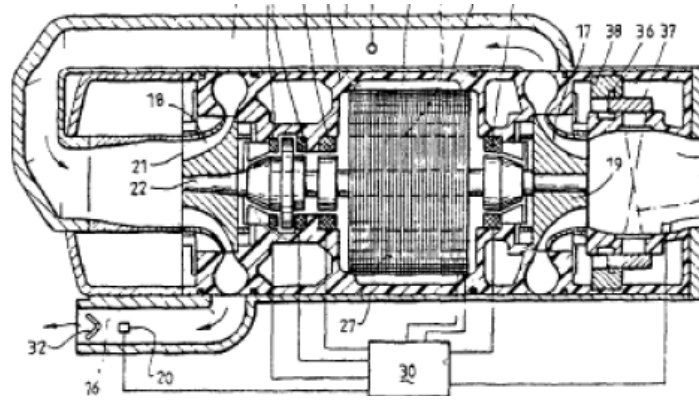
Principle cut through sketch of a hermetic turbo compressor (WO94/29597).
